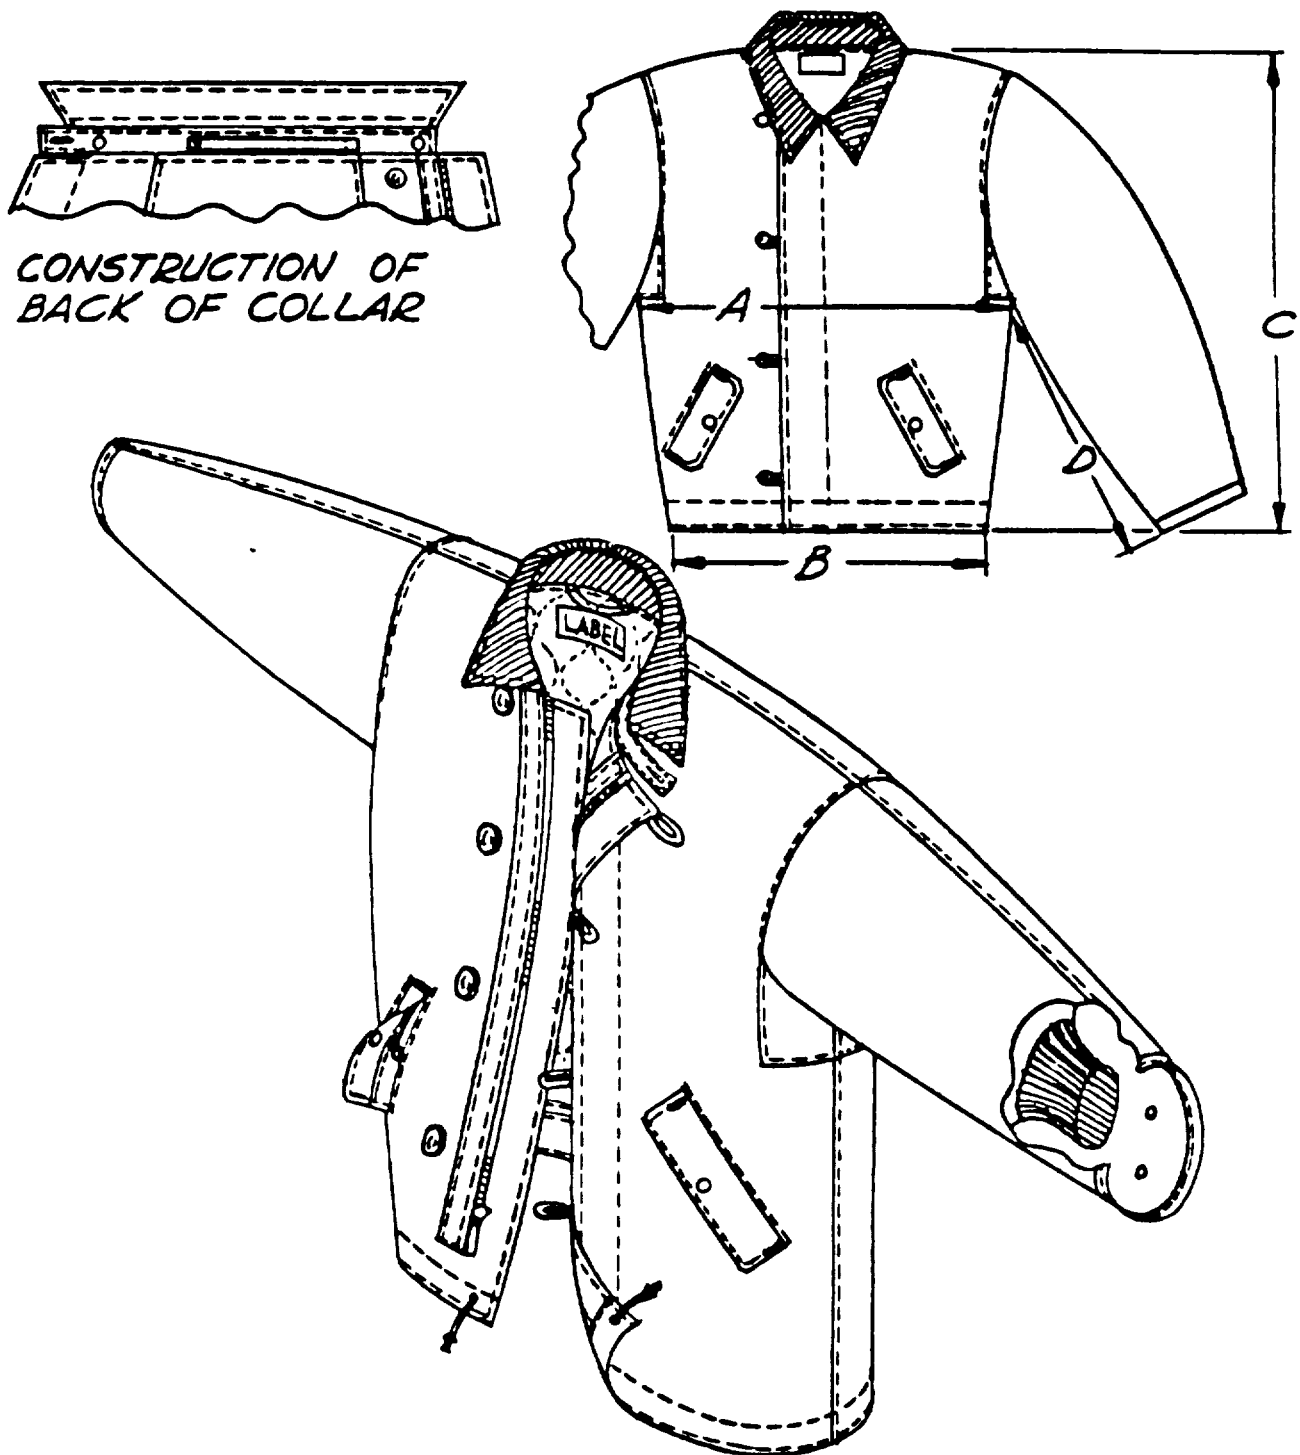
Jacket, Extreme Cold Weather, Impermeable
